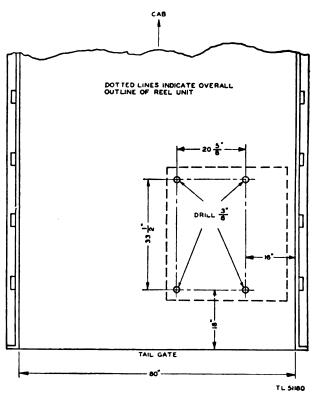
Mounting details on 21/4-ton 6x6 cargo truck.
